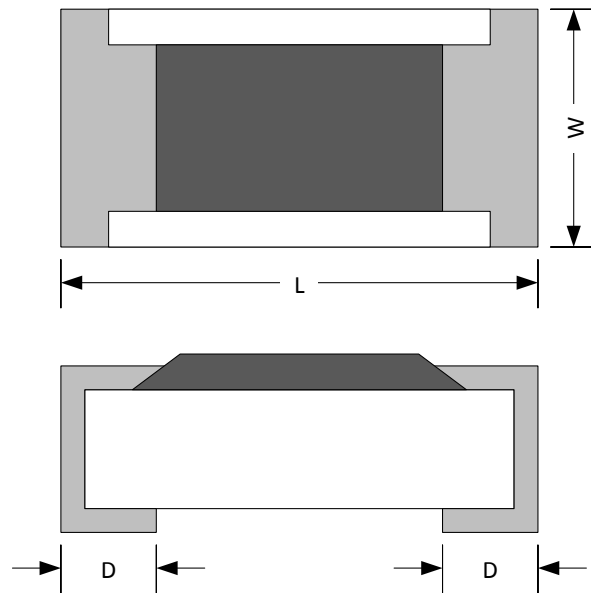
Top view and side view of the 0402 SMD resistor R1.
